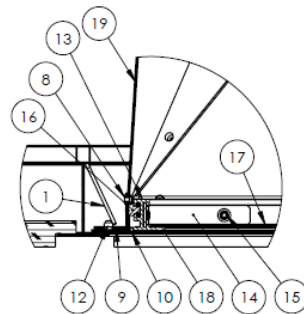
TYPICAL SOLATUBE DAYLIGHT DIMMER ASSEMBLY FOR 160DS, 290DS, 330DS, & 750D
